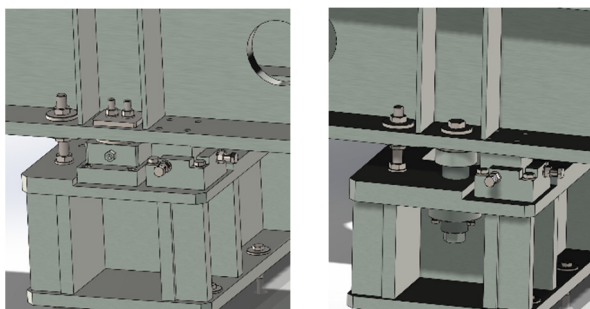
Structural drawing of position adjustment mechanism. Left: Leveling block type, Right: Bolt type.
